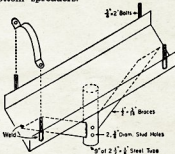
The boom mount is made of a 2 ft. length of 2" x 3/16" channel with four 3/8" x 2" bolts welded as shown. The clamps are 2" x 3/16". The support pipe is braced diagonally by $\frac{1}{2}$ " x 3/16" stock.
